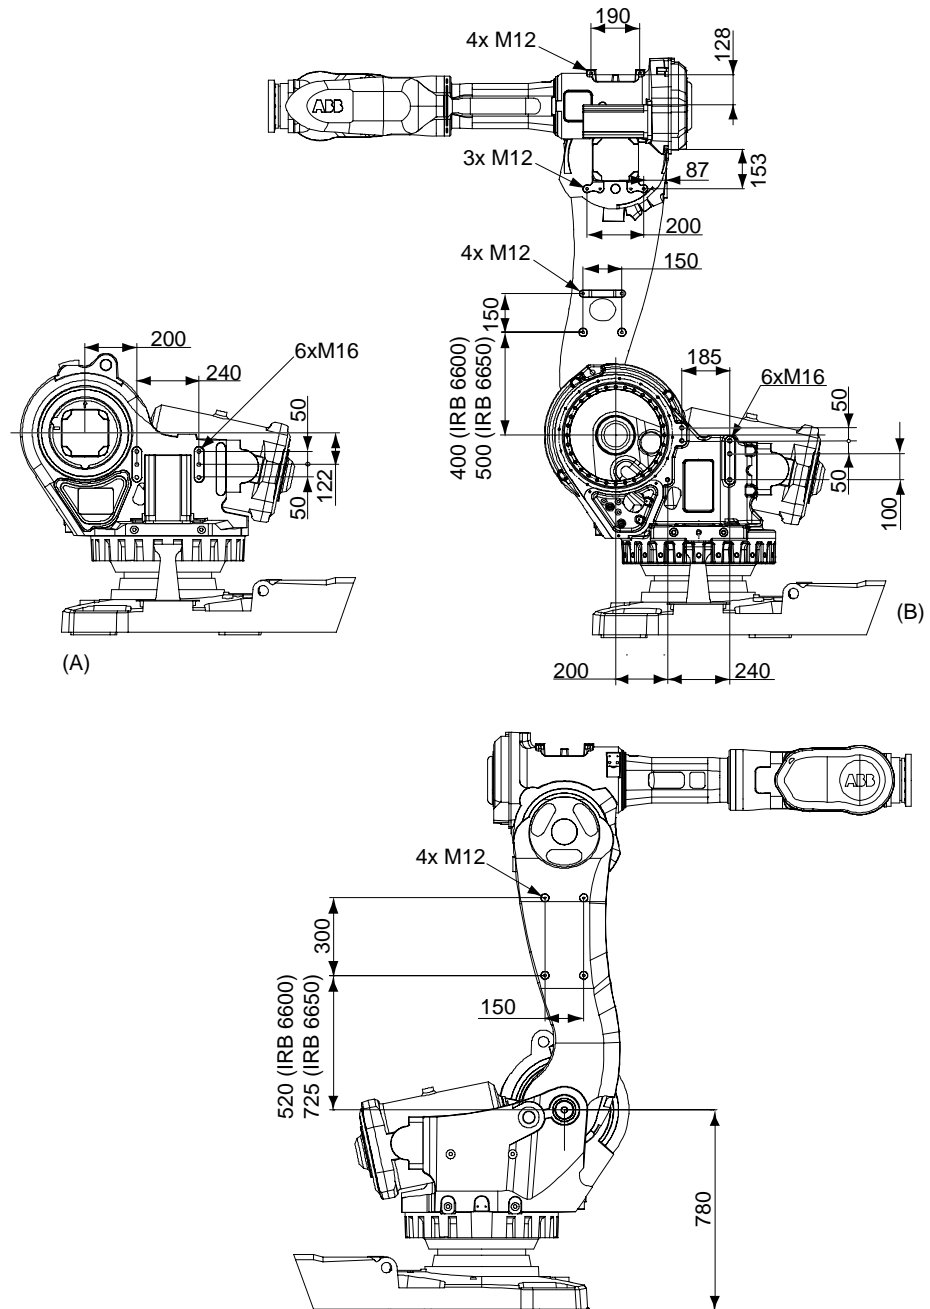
Holes for mounting extra equipment on the upper and the lower arm, and the frame on IRB 6600/ 6650 (dimensions in mm).
